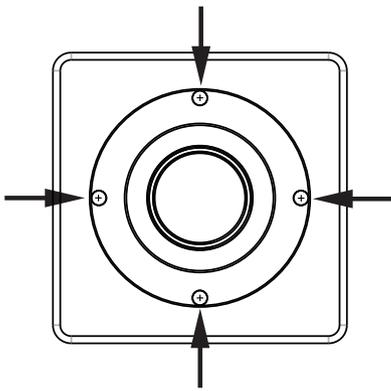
Crosshead screws that hold the lensmount (front view of the camera).
